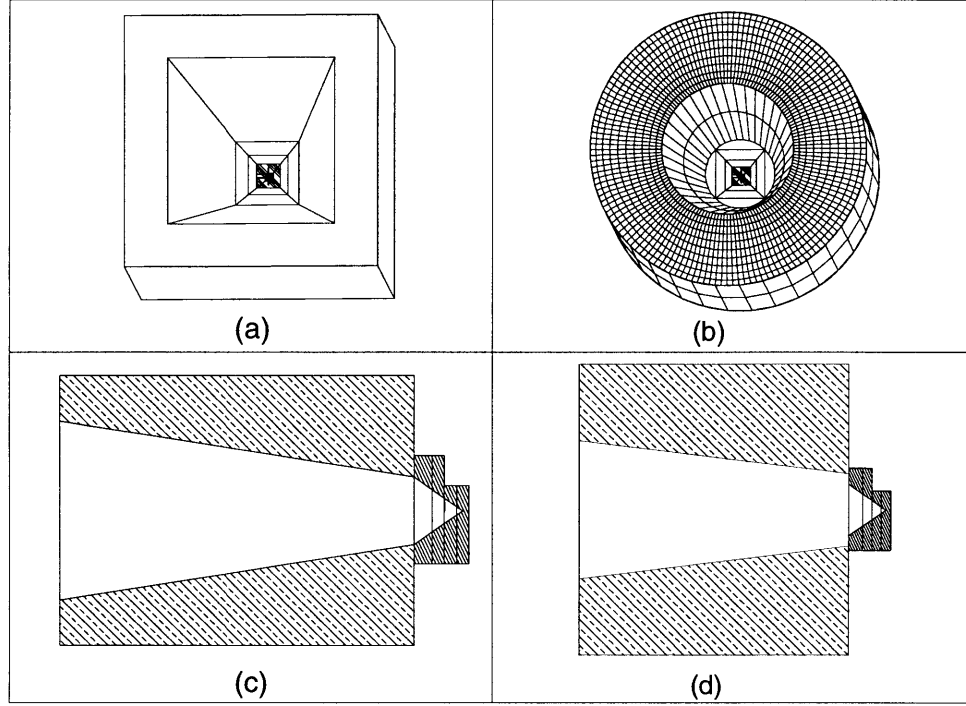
(a) *Perspective view of micromachined horn with rectangular machined section;* (b) *Perspective view of micromachined horn with circular machined section;* (c) *Cross-section of (a);* (d) *Cross-section of (b)
